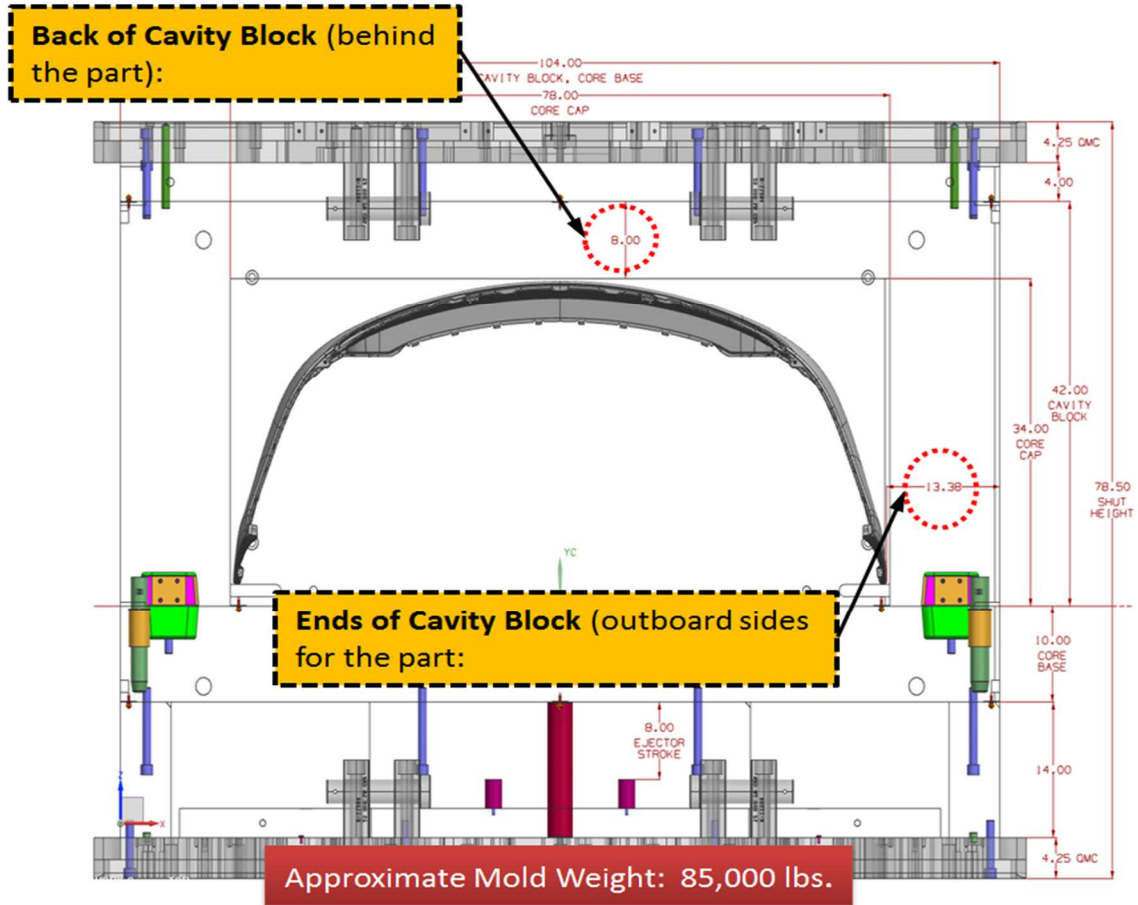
Top view of the cavity block (all dimensions are in inches)
